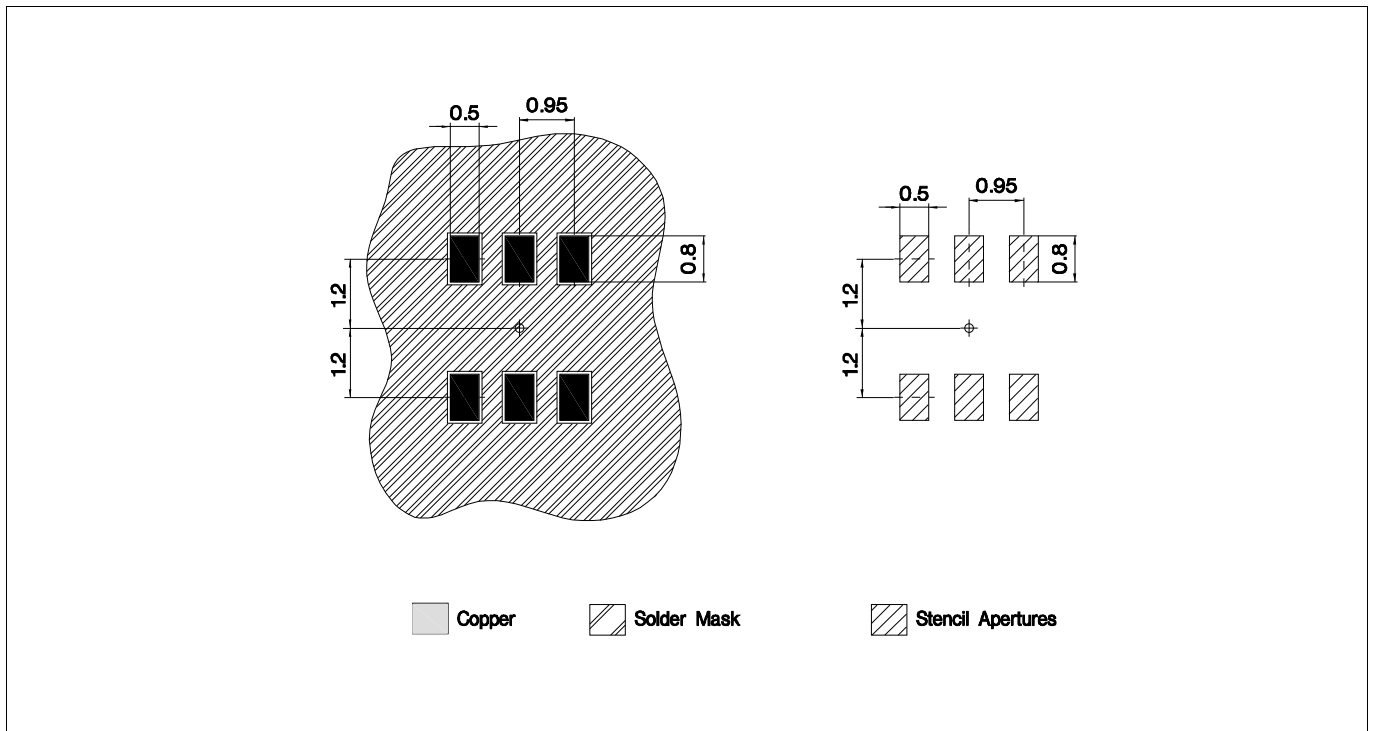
PG-SOT23-6-2 Footprint Dimensions
